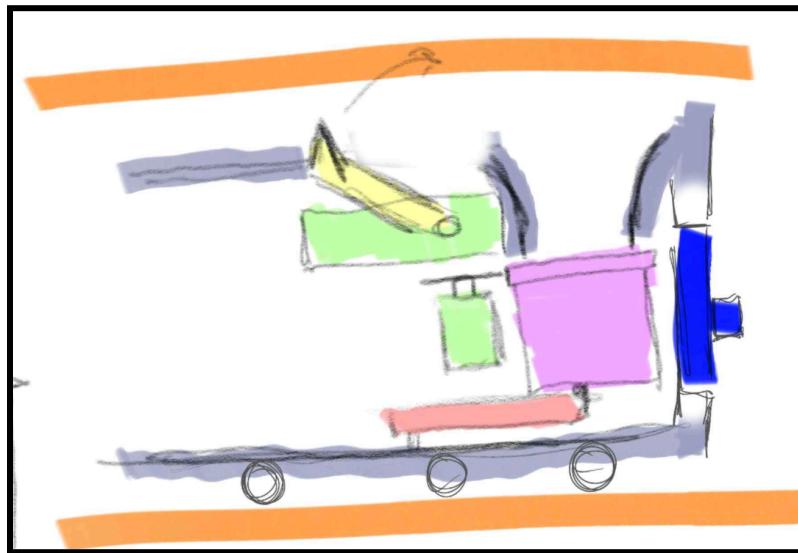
Tool Head Mounting Hardware Breakdown
